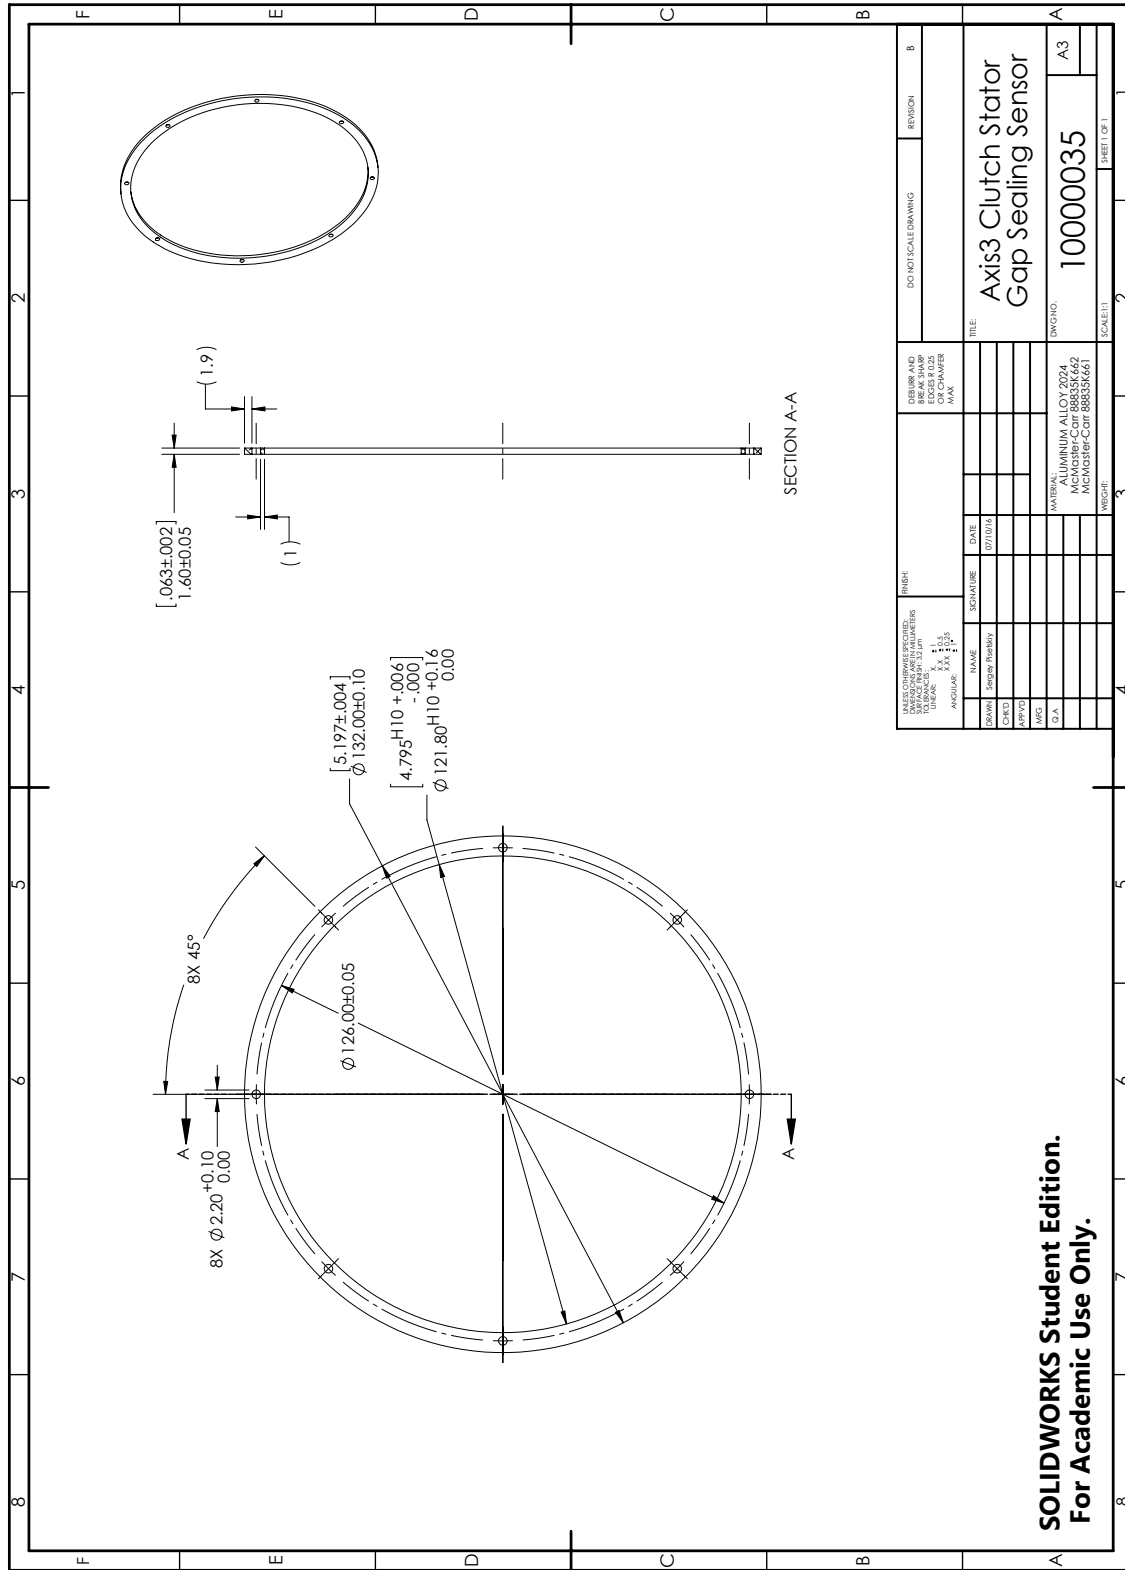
Drawing: Joint 3 clutch stator sealing spacer.
